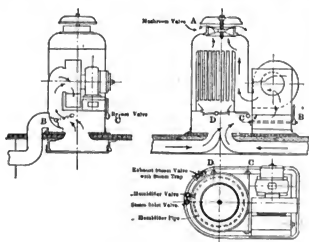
BOTTOM SECTION DECK TYPE THERMOTANK EXHAUSTING AIR.
